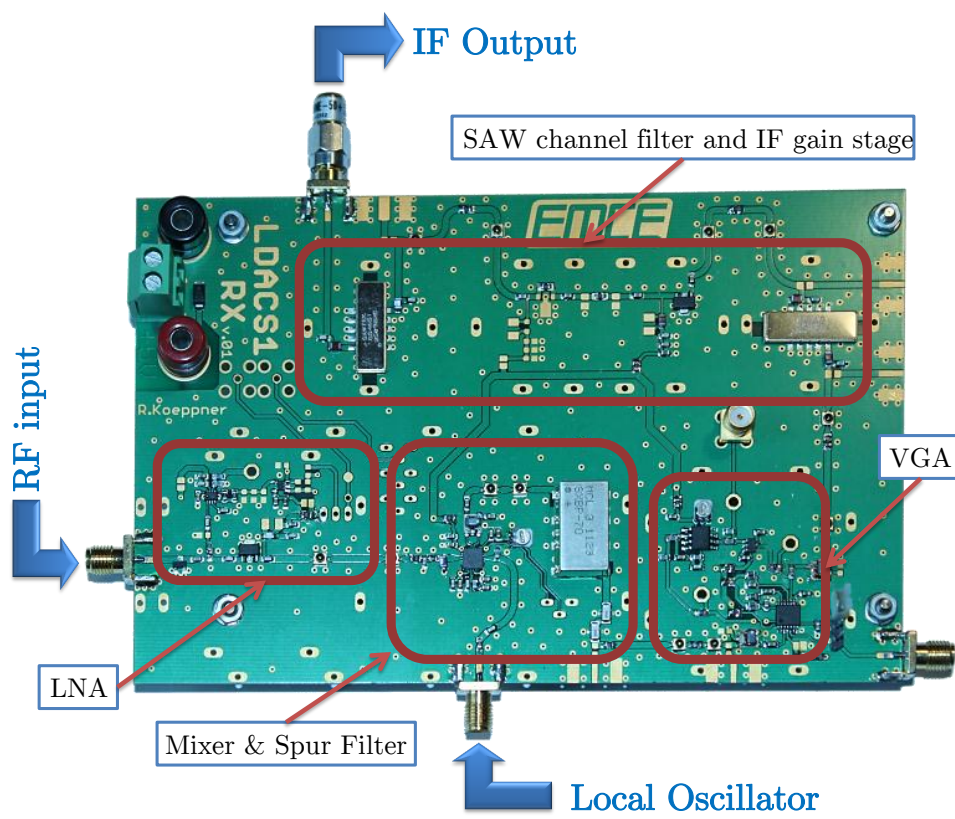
PCB of the LDACS-1 receiver frontend prototype.
